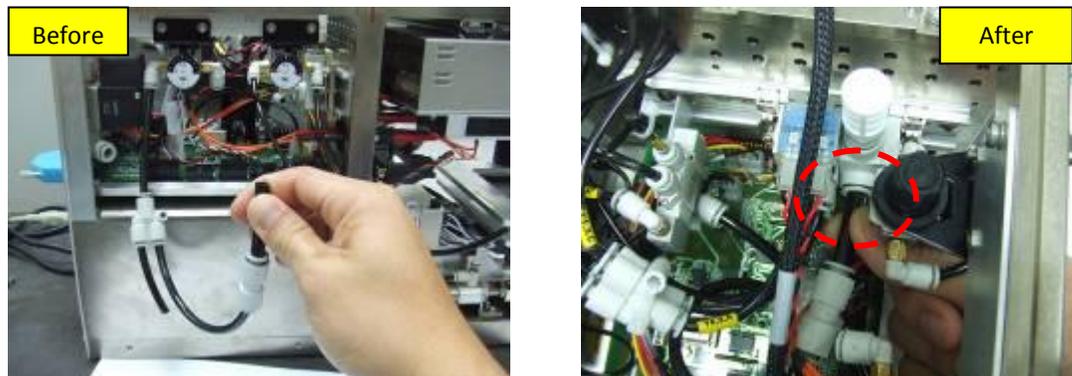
Plugging the M8 tubing end from the straight reducer 8 to 6 into the incoming port
